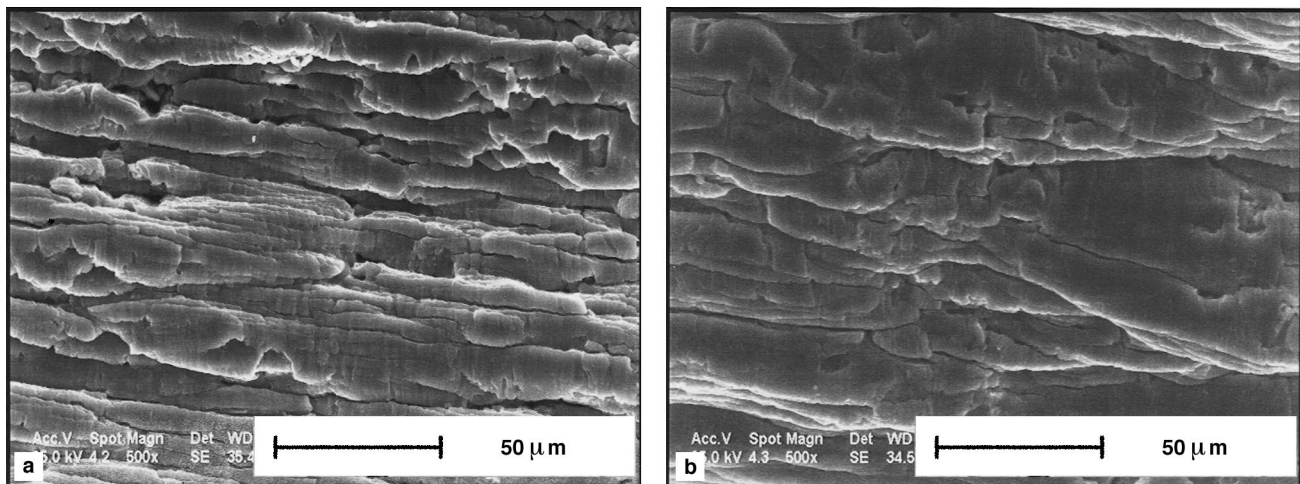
Shear planes on the upper surface of chips machined with uncoated tools: (a) $V_t = 630$ m/min, $f = 0.03$ mm/rev; (b) $V_t = 630$ m/min, $f = 0.17$
